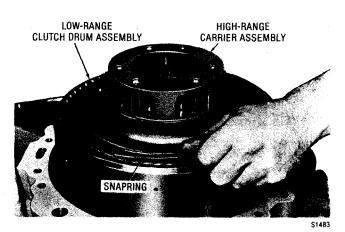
Installing snapring retaining high-range planetary carrier assembly (TRT-3 overdrive)
